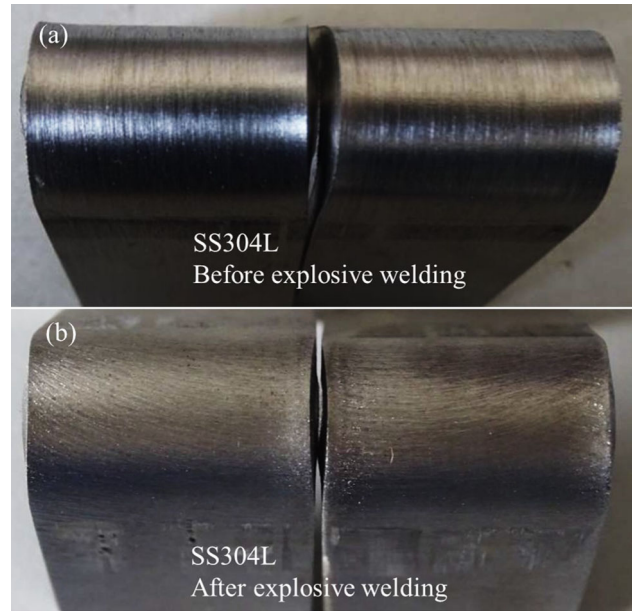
Intergranular corrosion specimens: (a) the SS304L before explosive welding and (b) the SS304L after explosive welding
